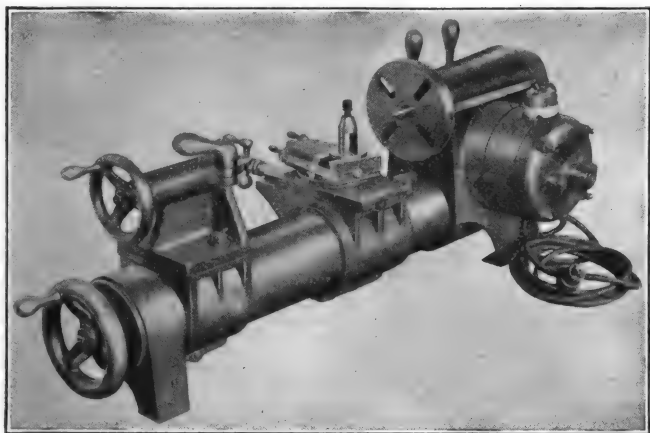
A screw-cutting lathe with a motor mounted in the head.
